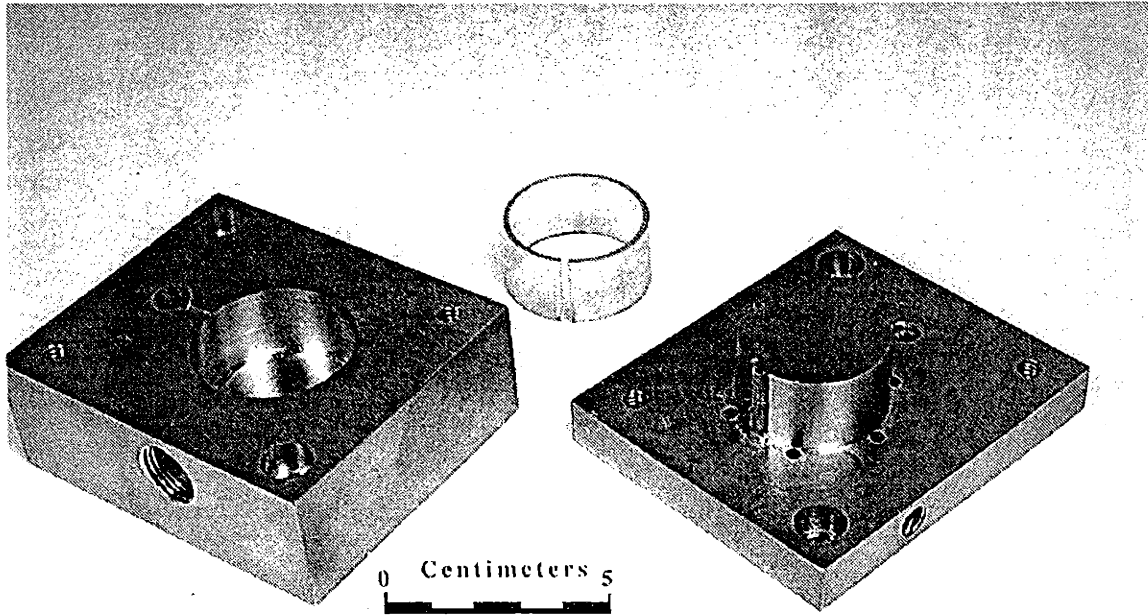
Infiltrated and machined 3D Printed cavity and core inserts with conformal cooling channels.
